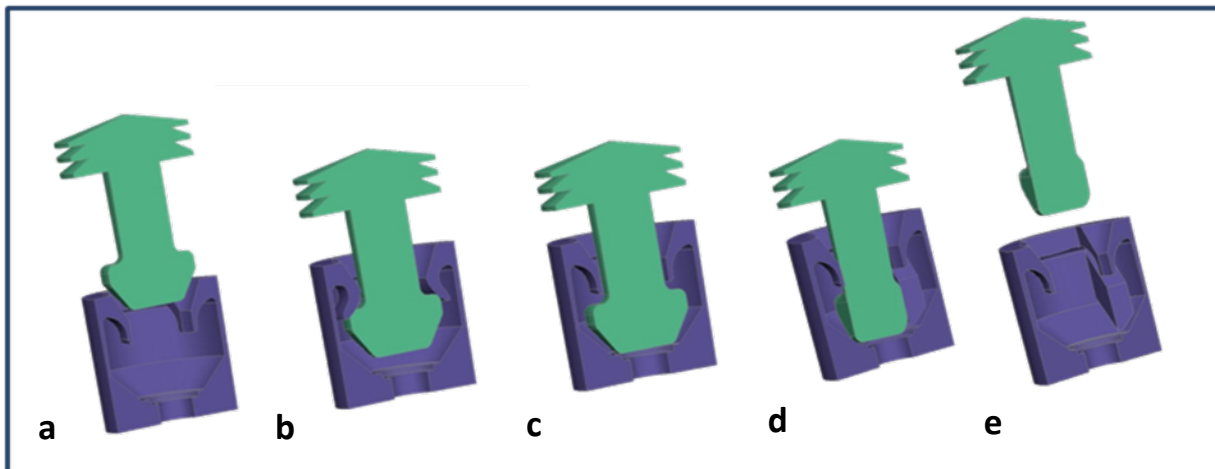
Mechanism of Generation 2 prototype. a) Attachment is brought into contact with abutment cap. b) Flanges deflect, allowing attachment to snap into abutment cap. c) Prongs/flanges hold attachment in place. d) User rotates attachment to align with slits. e) User pulls prosthetic to release attachment from abutment cap.
